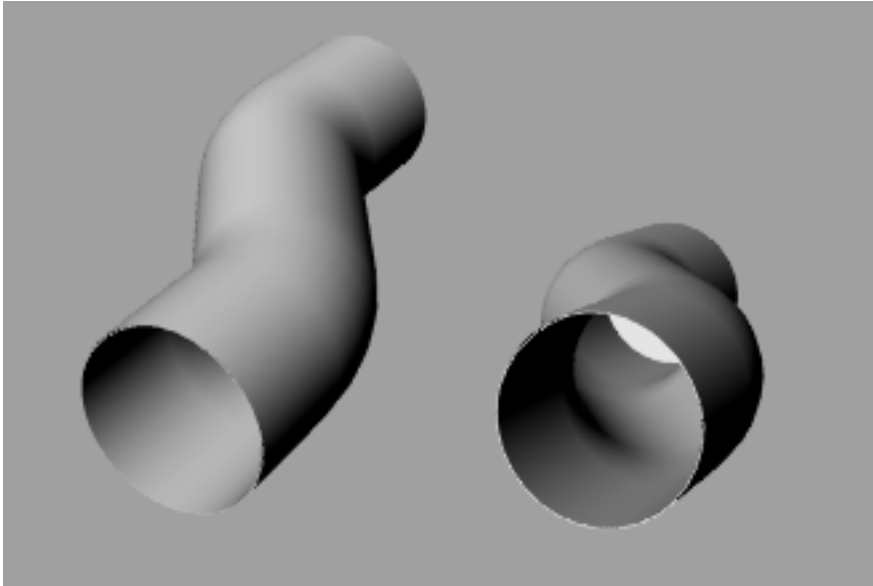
CAD model of the S-duct cavity. Inside diameter 300 mm length 1200 mm. Please refer to figures 3 and 4 in the measurement section for more details.
